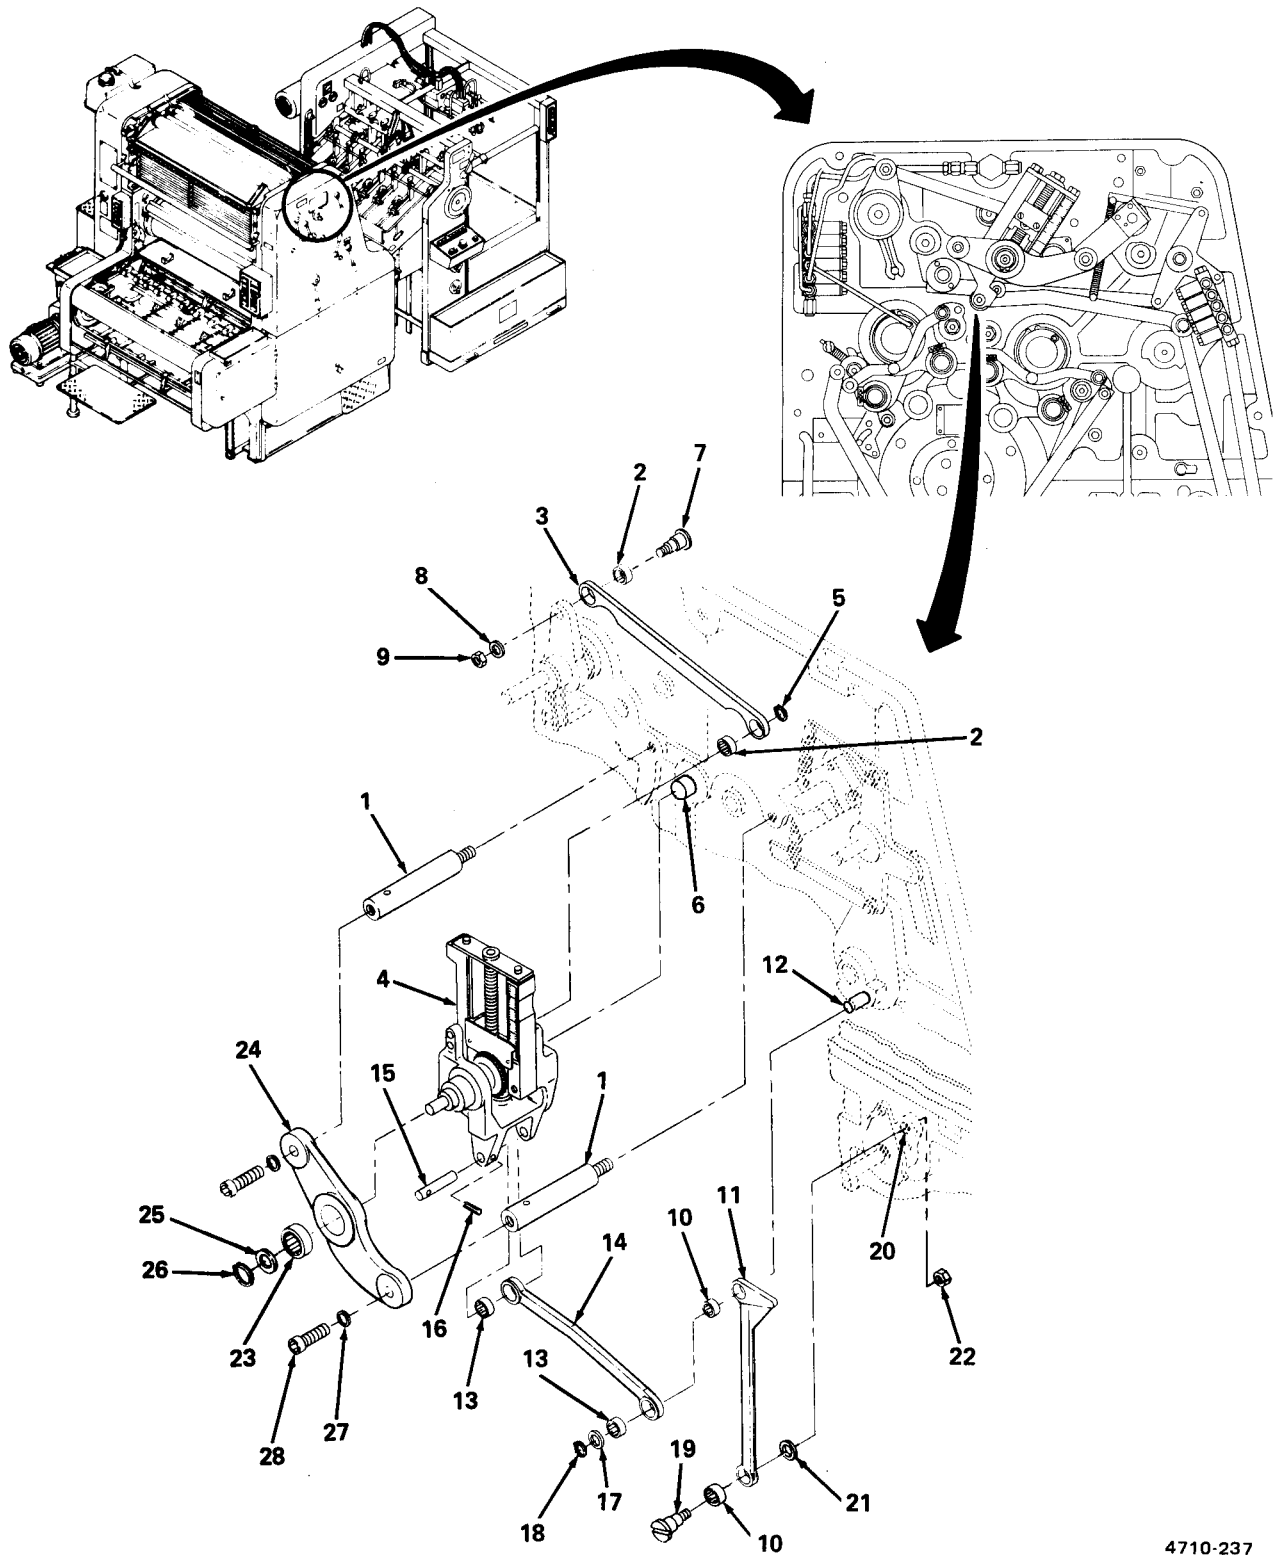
Ductor Roller Swing Mechanism Installation.
